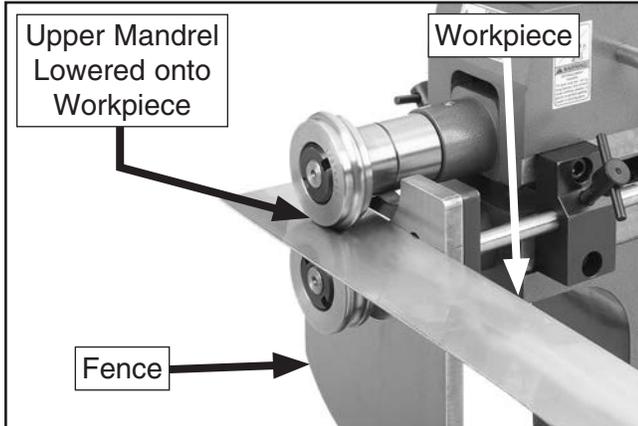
Workpiece placed on lower mandrel in preparation for bead rolling.
